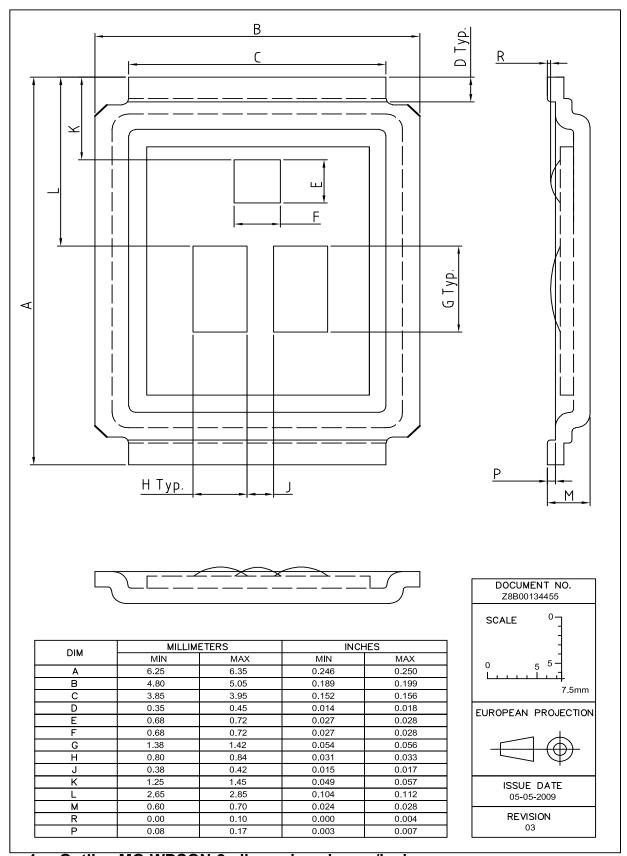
Outline MG-WDSON-2, dimensions in mm/inches
